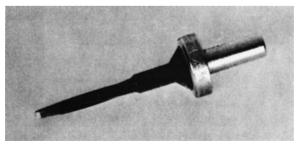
A tool for drilling pilot hole, shank-clearance hole, and countersink in one operation.
